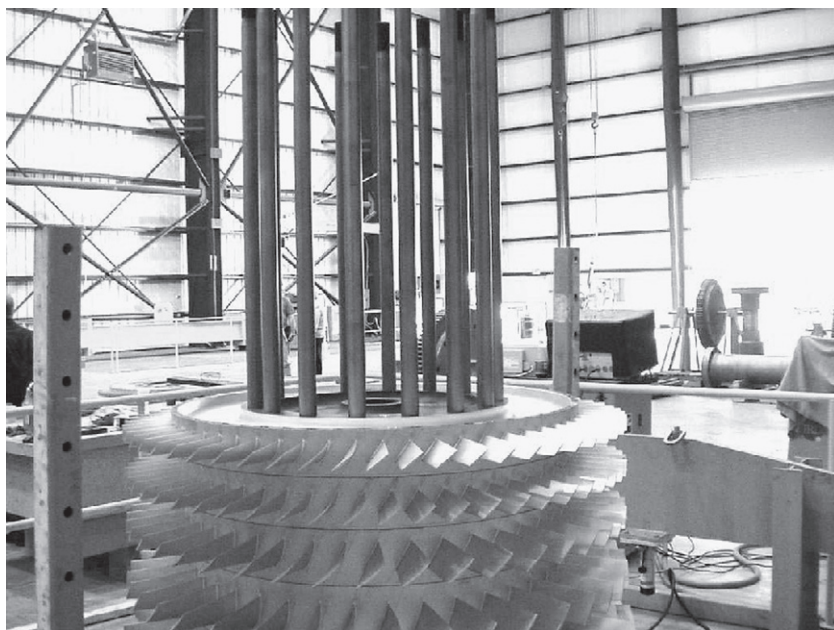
Compressor rotor stack (note the long bolts that position the disks).
